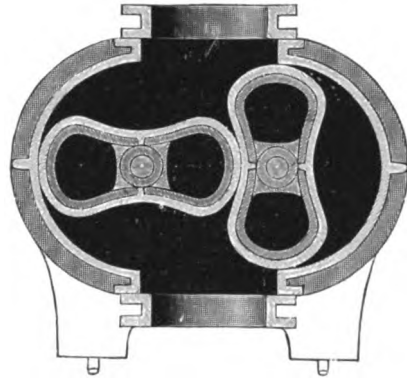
SECTION OF PRESSURE BLOWER, MADE BY THE CONNERSVILLE BLOWER CO.
